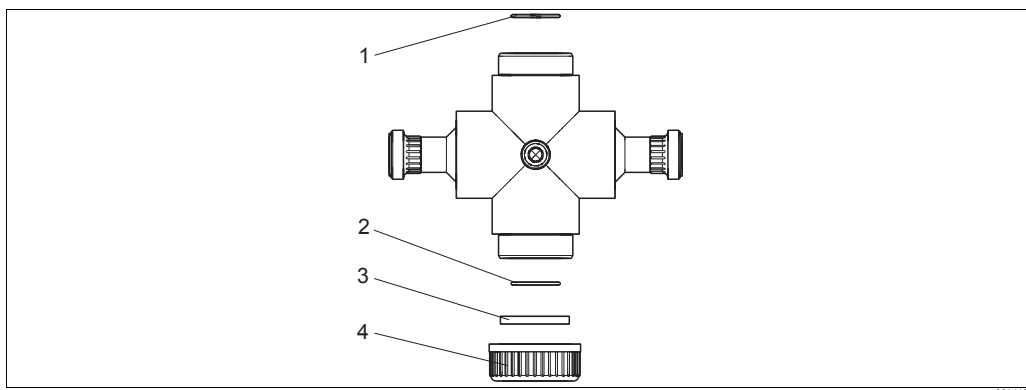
Assembly body with bottom fixing ring and dummy cover
